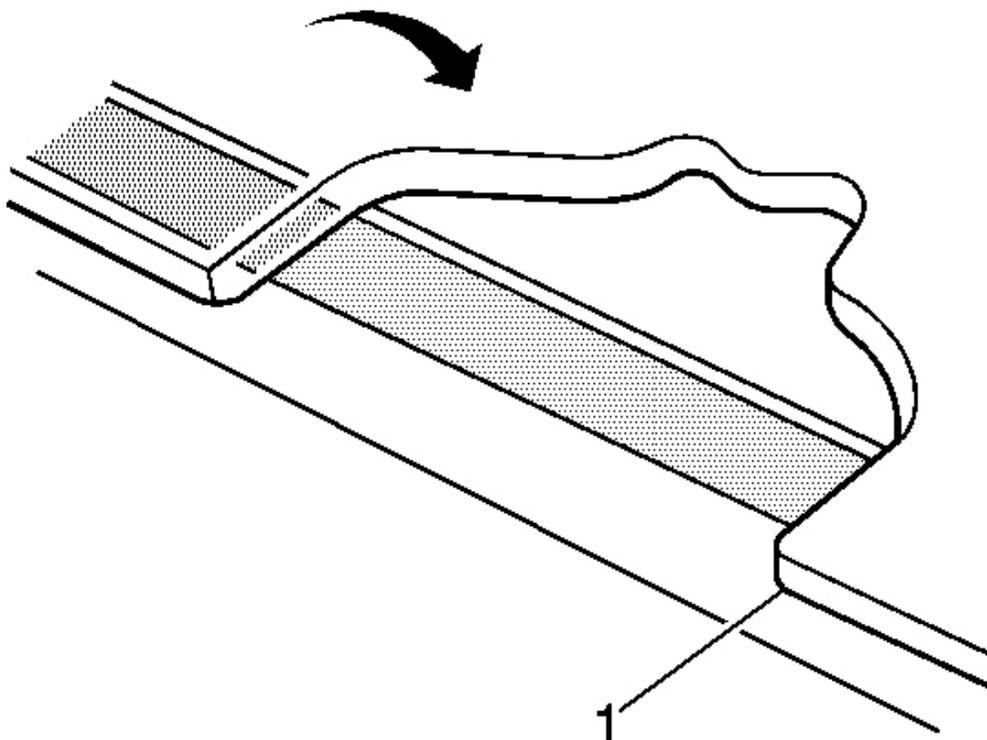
Applying Pinch-Weld Primer
